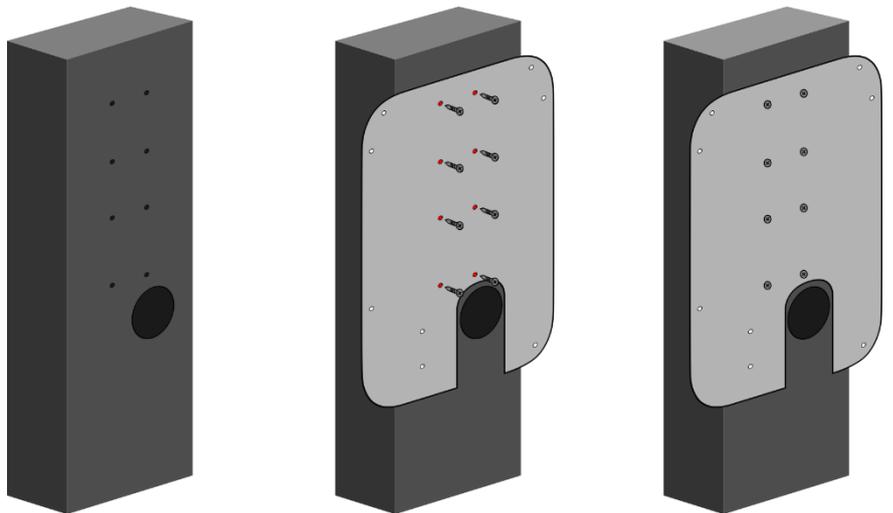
Possible mounting of adapter plate for installation of mounting bracket
